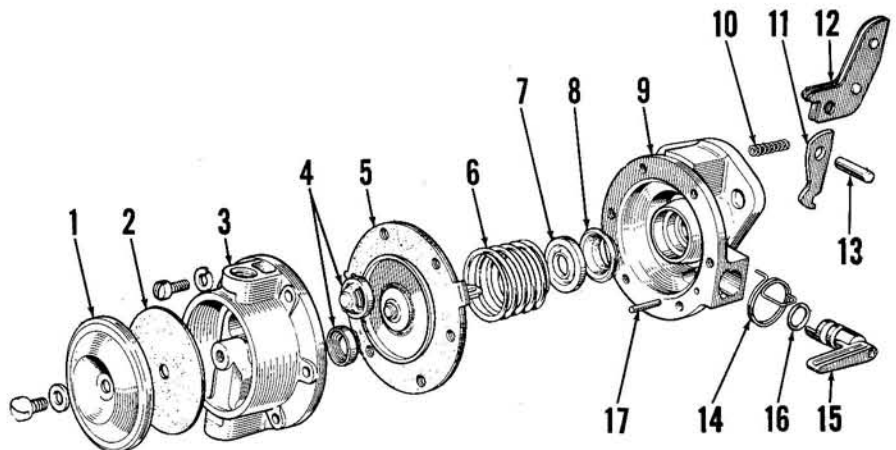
Exploded view of fuel lift pump assembly used on models "FSM" and "New FSM" with Simms Minimec fuel injection pump.
